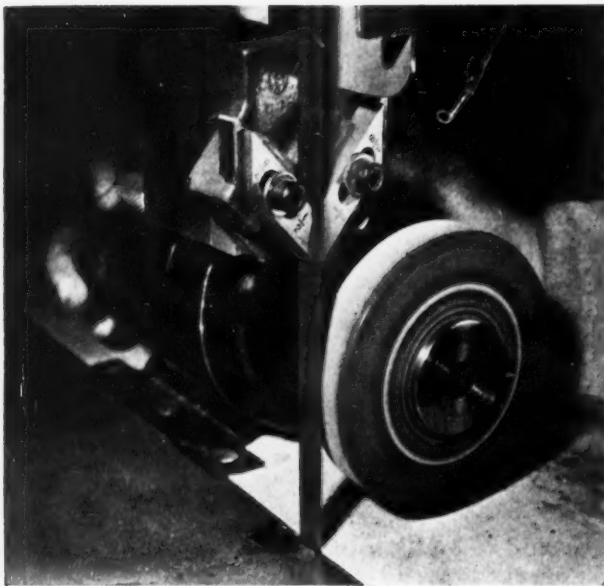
Method of Grinding Tapered Edge on Band Saw Used for Cutting Sponge Rubber
